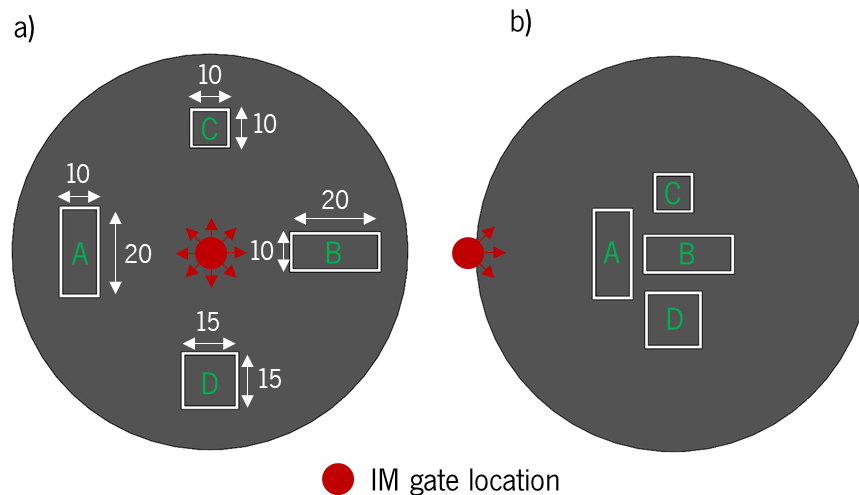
Samples general dimensions in millimetres and cutting operation scheme: A – sample for perpendicular measurements; B – sample for parallel measurements; C – sample for transversal measurements; D – sample for impedance measurements.
